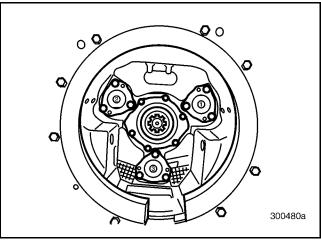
Mark Front Countershaft Front Bearing Covers for Placement
